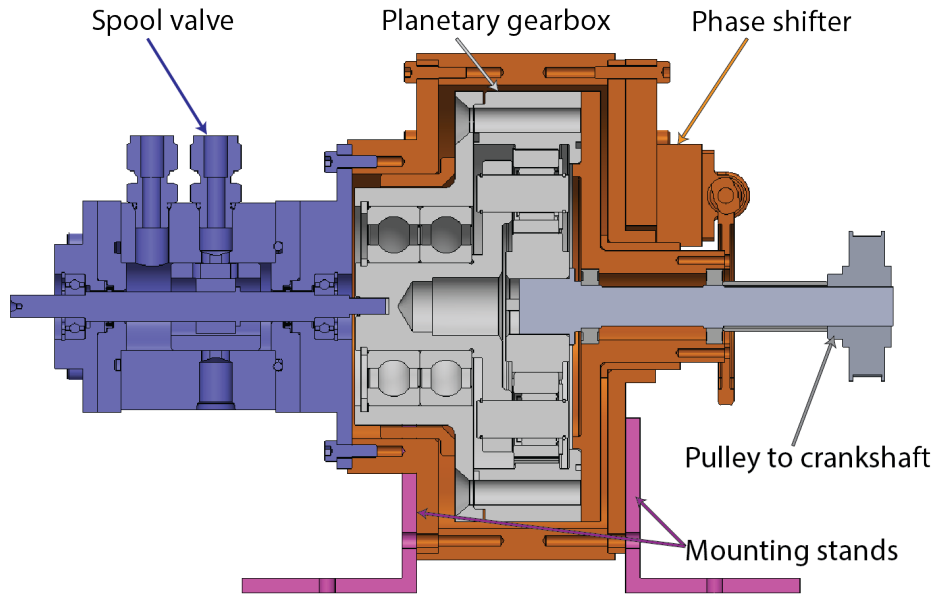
Section view of combined phase shifter and spool valve assembly
